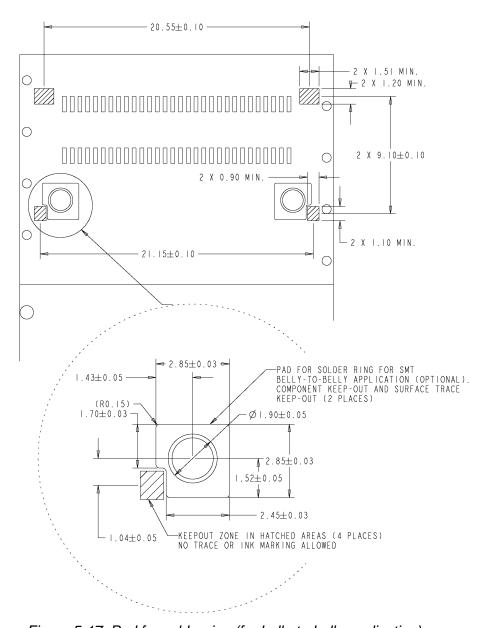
Pad for solder ring (for belly-to-belly application)
